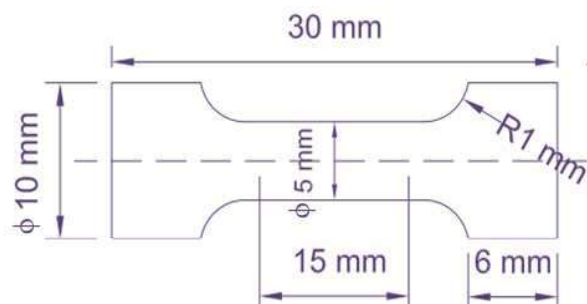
Schematic diagram of dumbbell shaped tensile specimen
